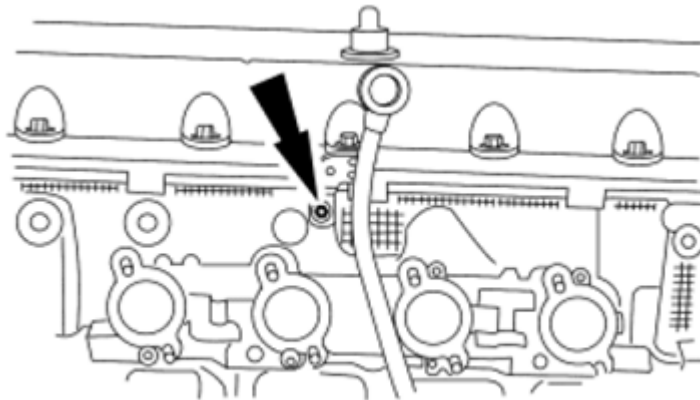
Identifying Exhaust Manifold Gaskets And Nuts
